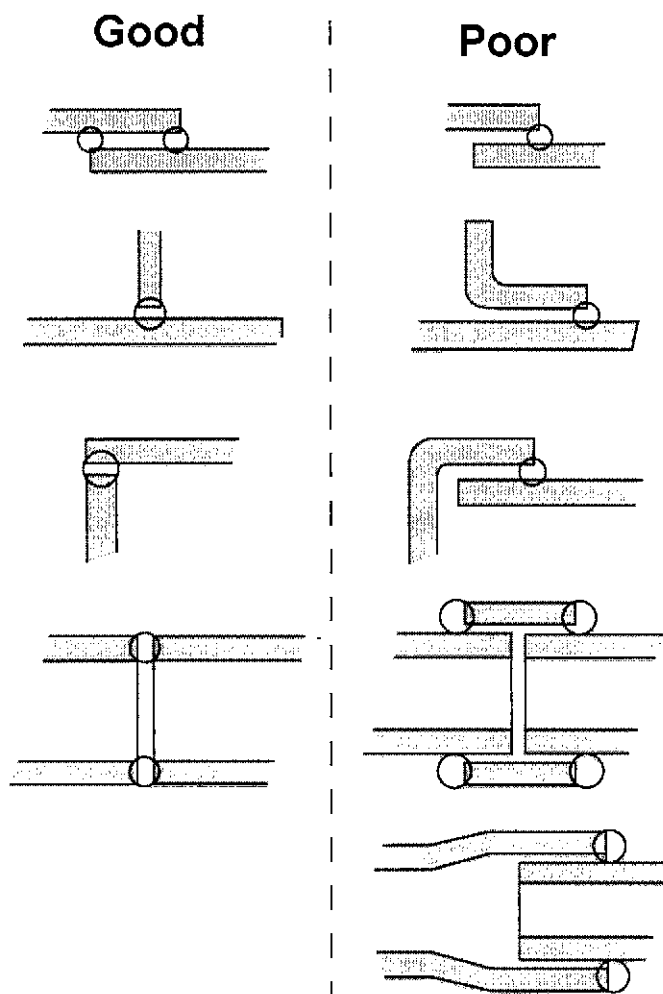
Design Features where Crevices are Created (from Miller & Boulton, Guide to Stainless Steel Fabrication Design ...)
